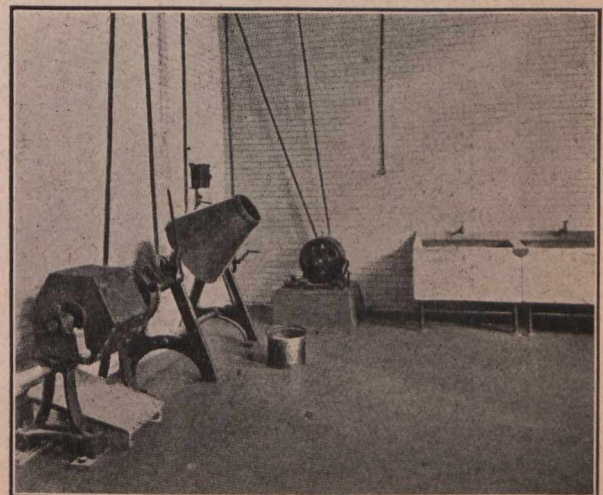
Tumbling barrel, drying drum, and washing tanks in Annealing Room.
